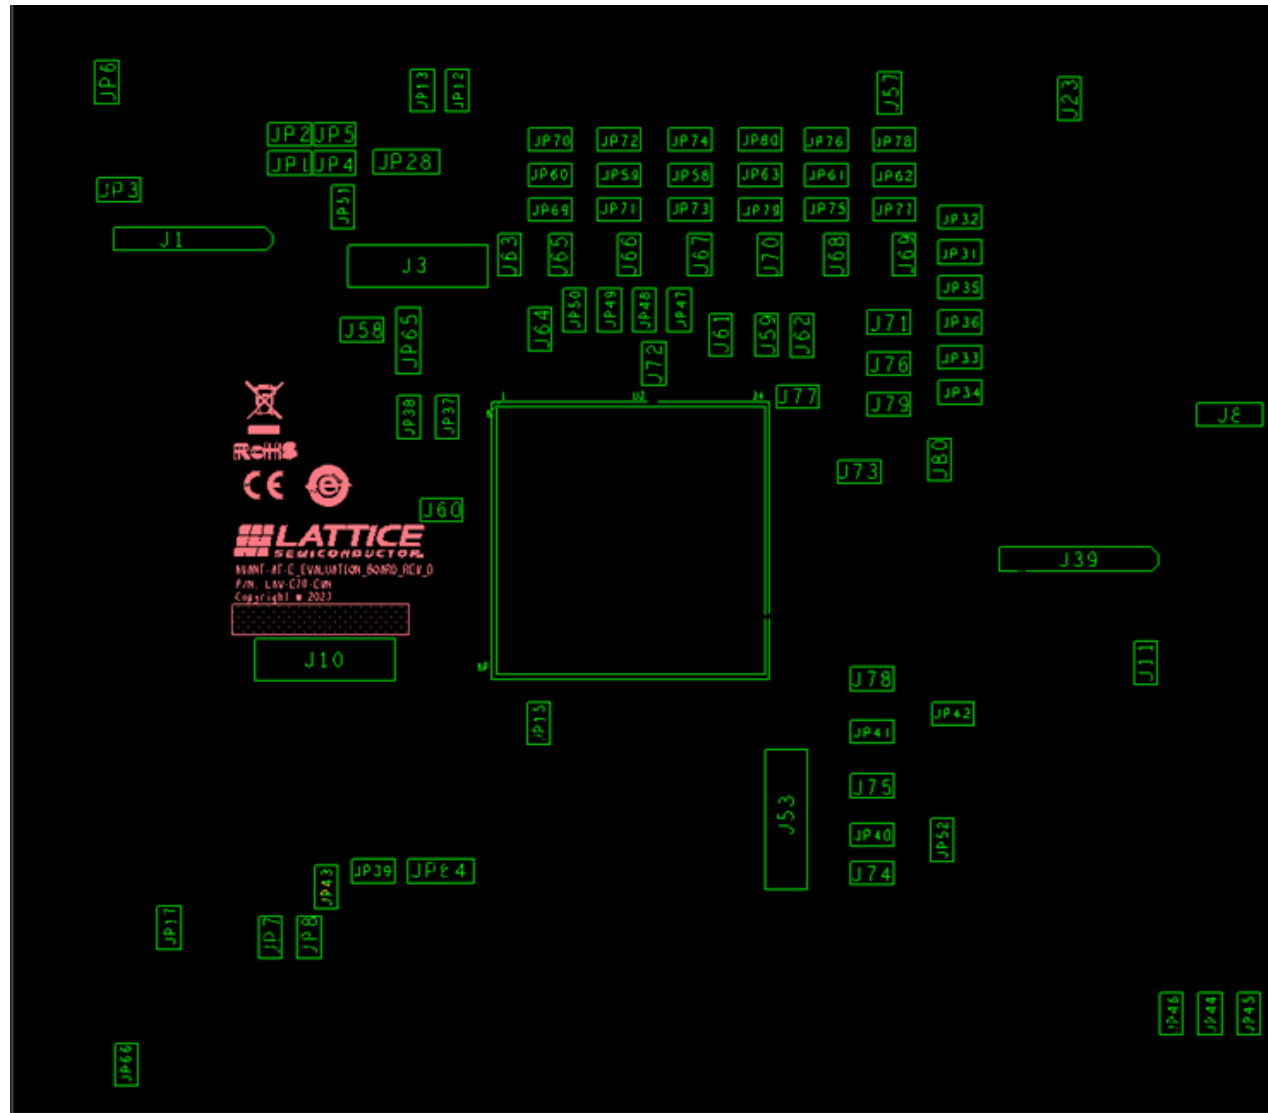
Top View of Avant Evaluation Board – Jumper Locations
